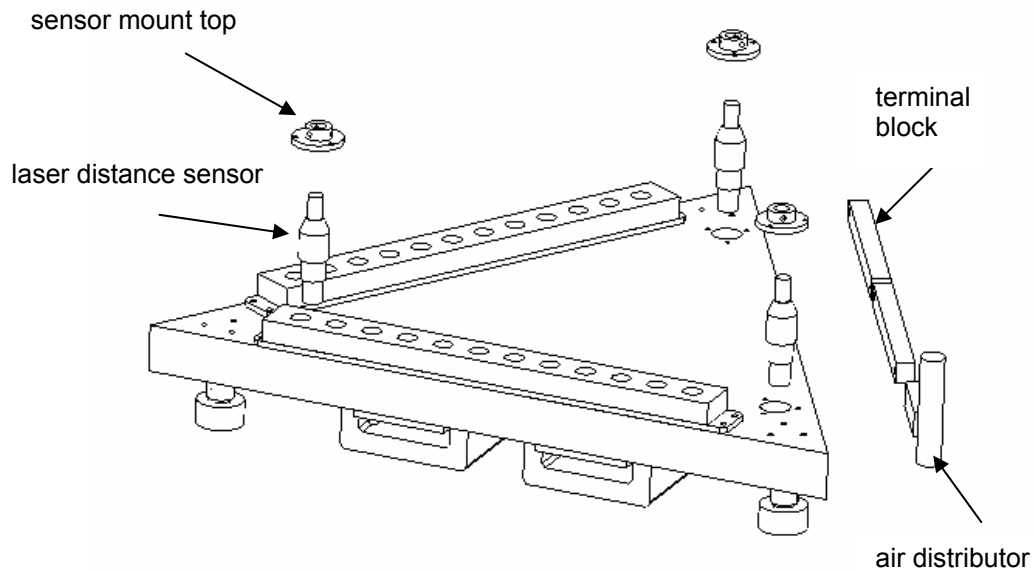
Exploded view of the assembly of the parts at the top [after Bhat]
